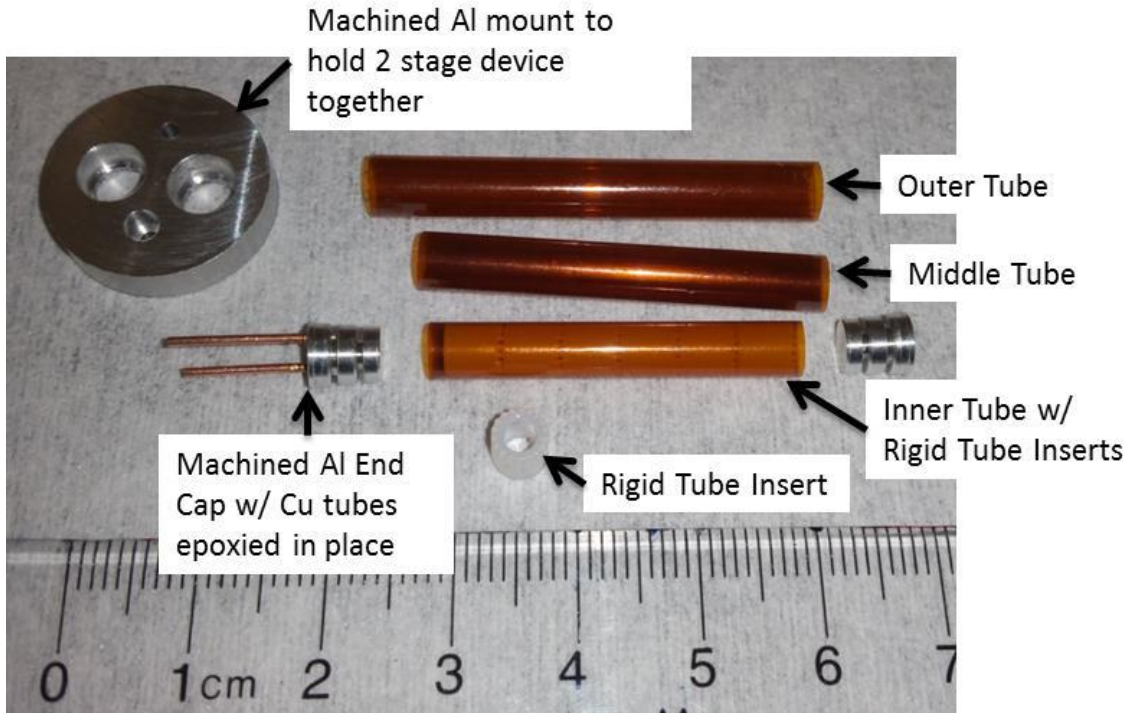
All components used for one tube-in-tube heat exchanger.
